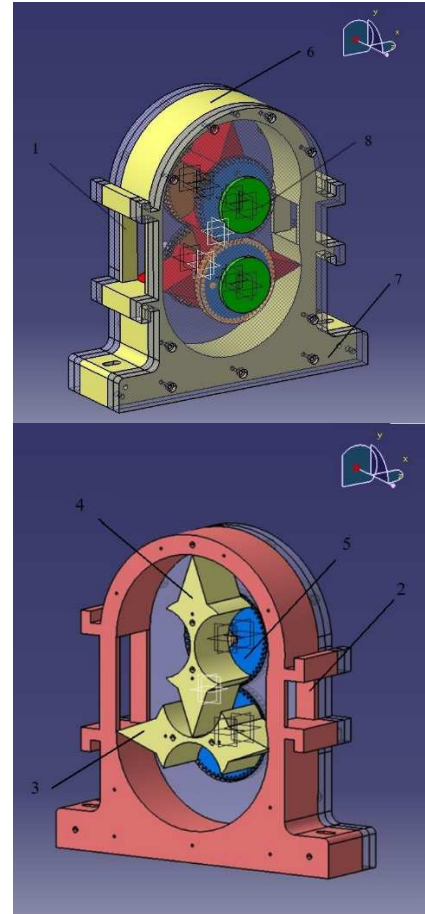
Three-dimensional view of the machine. 1- input ; 2 - output; 3 - bottom impeller; 4 - top impeller; 5 - gearing; 6- casing; 7 - sidewalls; 8 - cap sealing.
